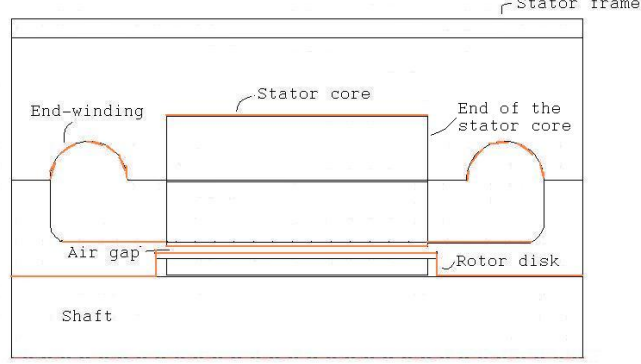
Axisymmetric geometry of the high-speed machine and different sections of the machine.
